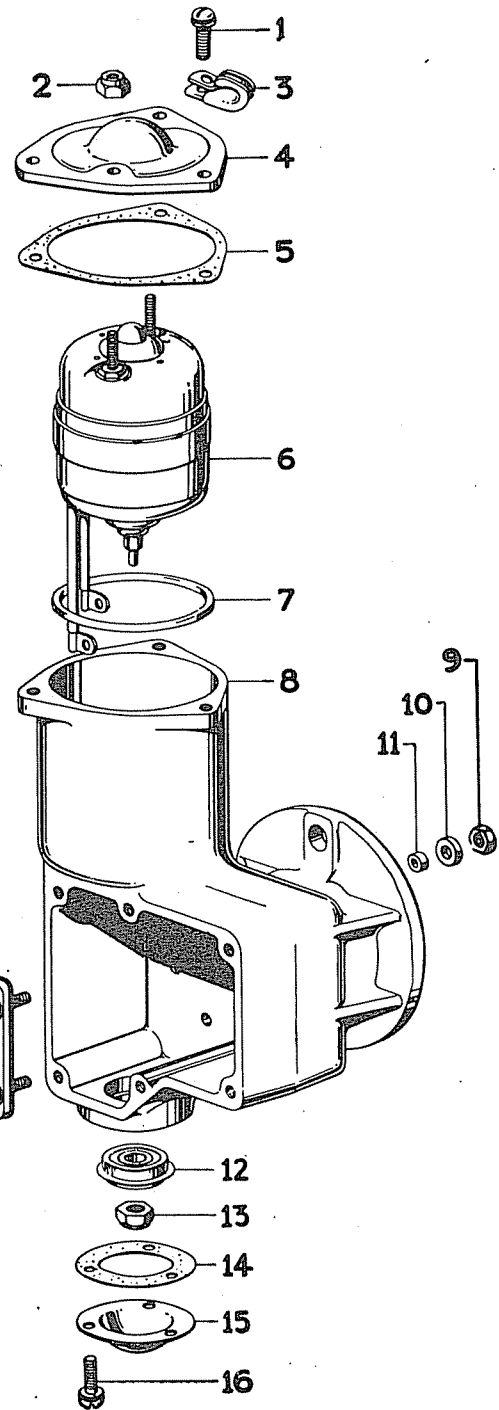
AXLE SHIFT UNIT (EXPLODED VIEW)
